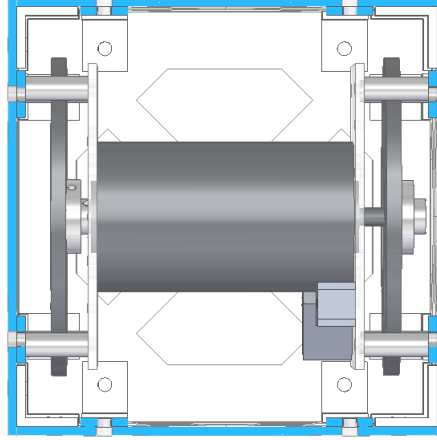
Section view from the side of cube in Solid Edge CAD showing the motor holders. Made in Solid Edge
